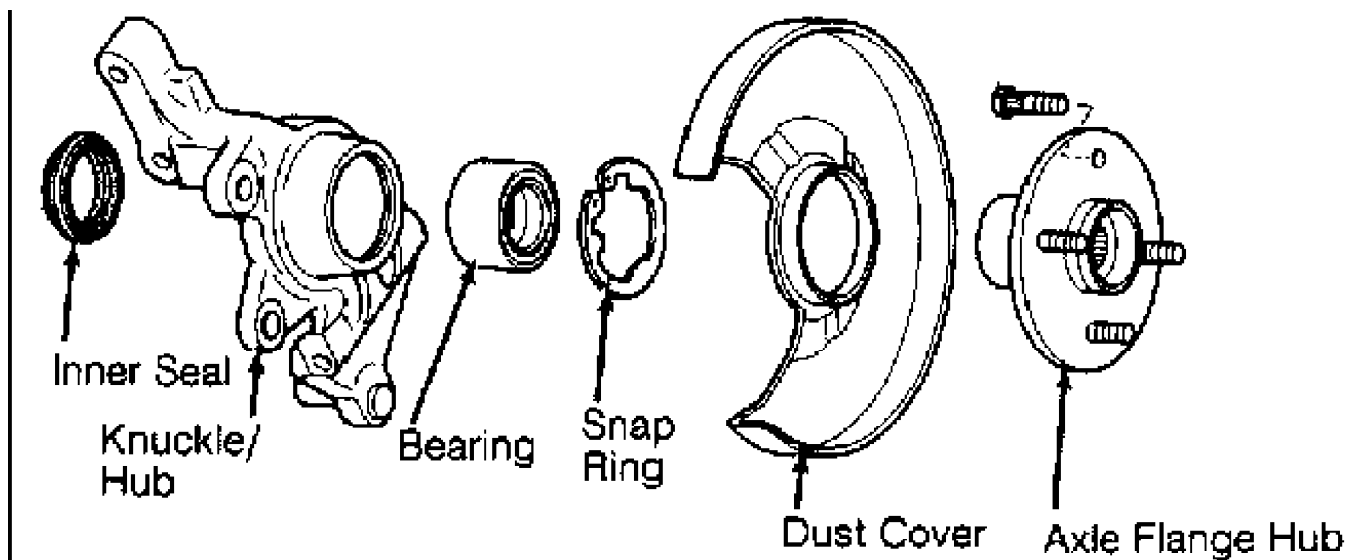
Exploded View of Rear Hub Assembly (Protege 4WD)
